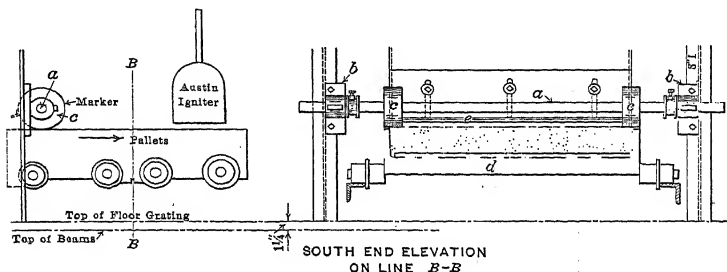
Plate-feeder for Dwight-Lloyd straight line machine.
